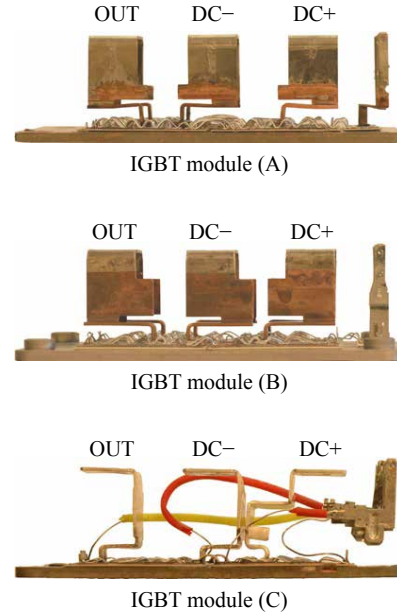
Side view of the disassembled half-bridge IGBT modules of manufacturers (A) - (C) with visible construction of the screw terminals for the power connections.
